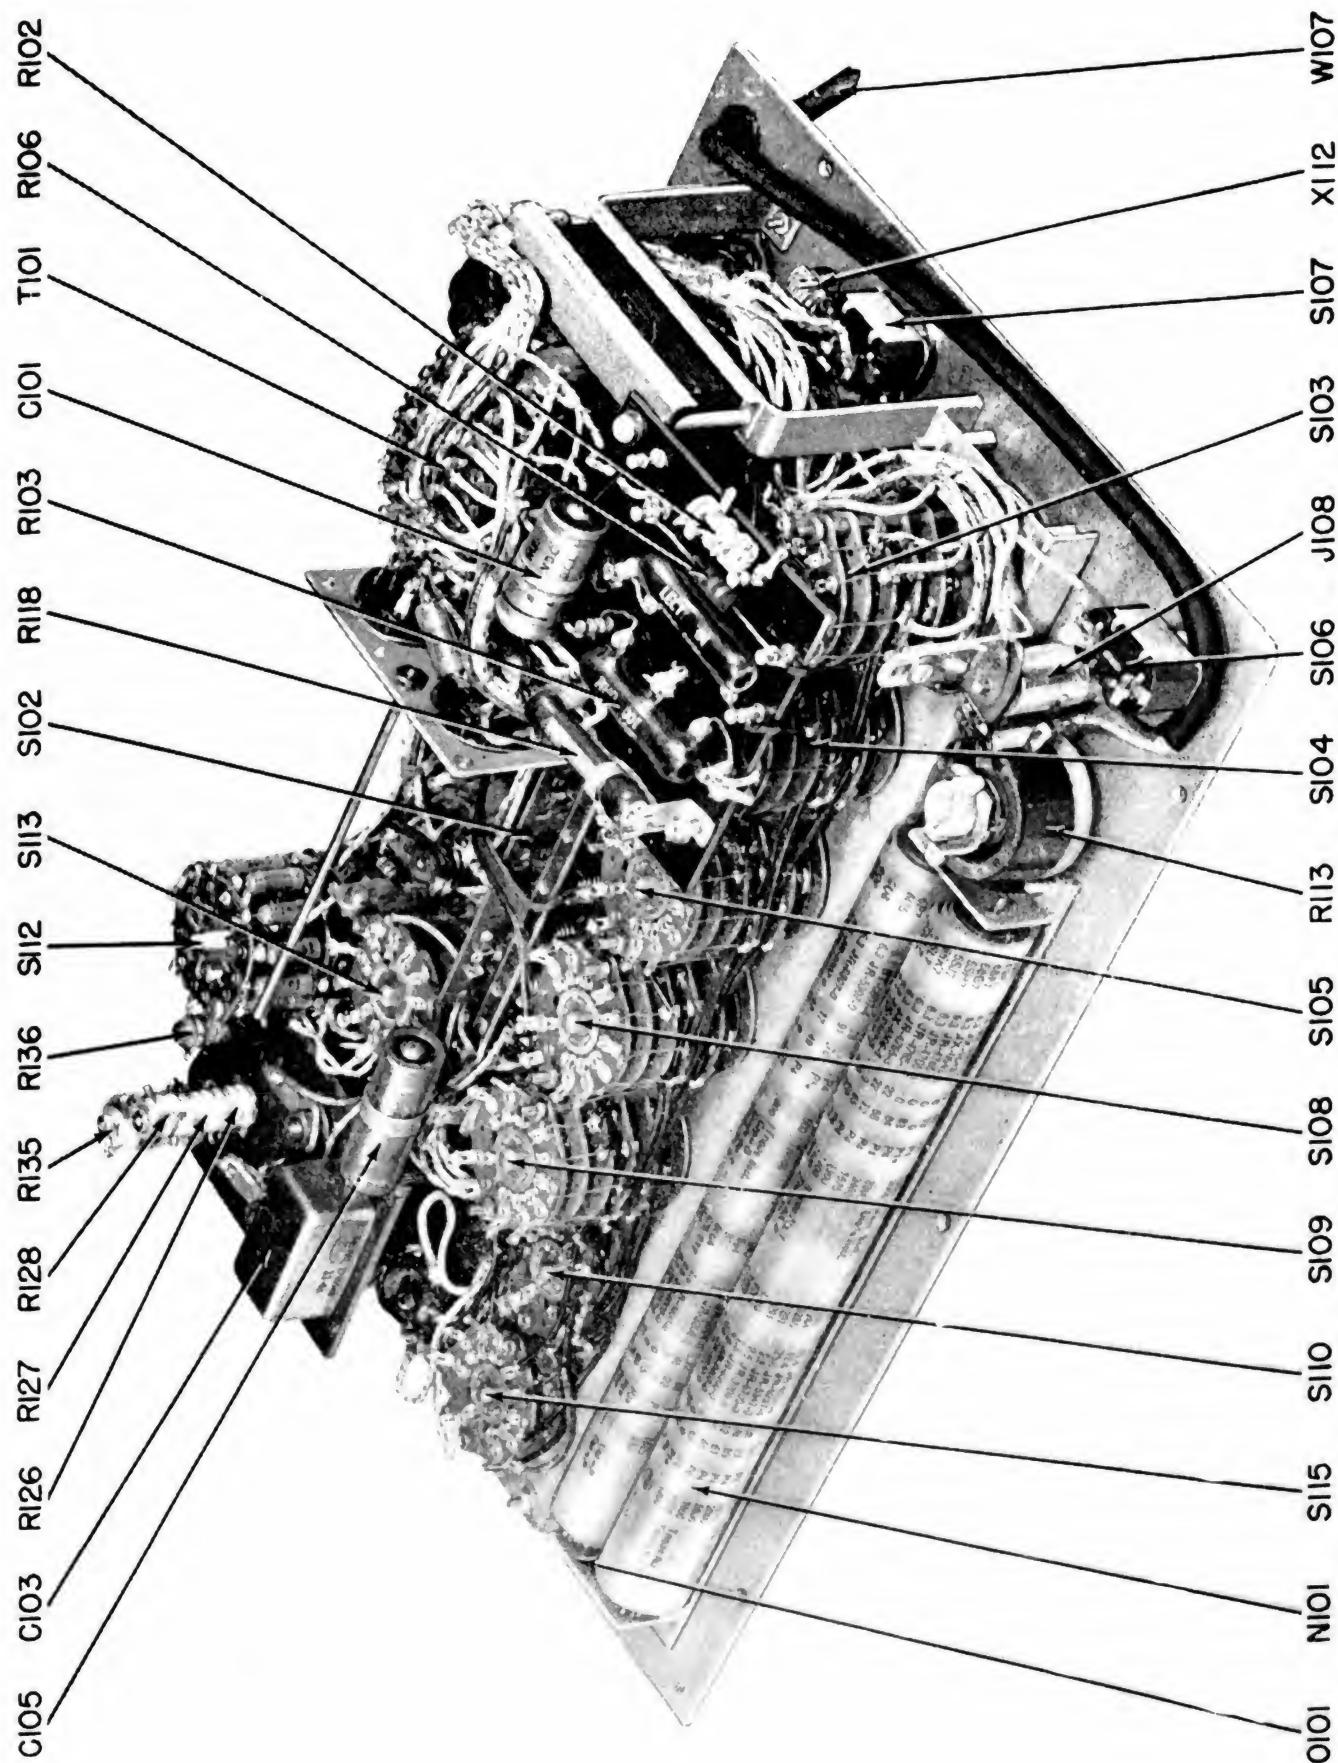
Internal View of Tube Tester TV-3/U (Front Right Oblique)
